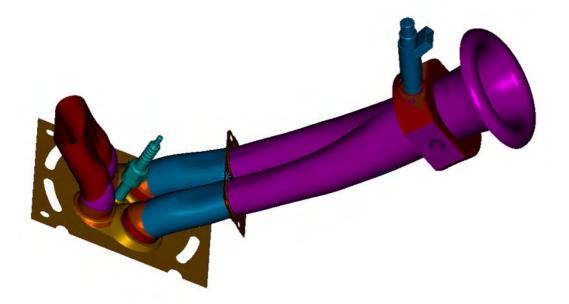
CAD image of the downdraft intake duct for the W-9 engine.
